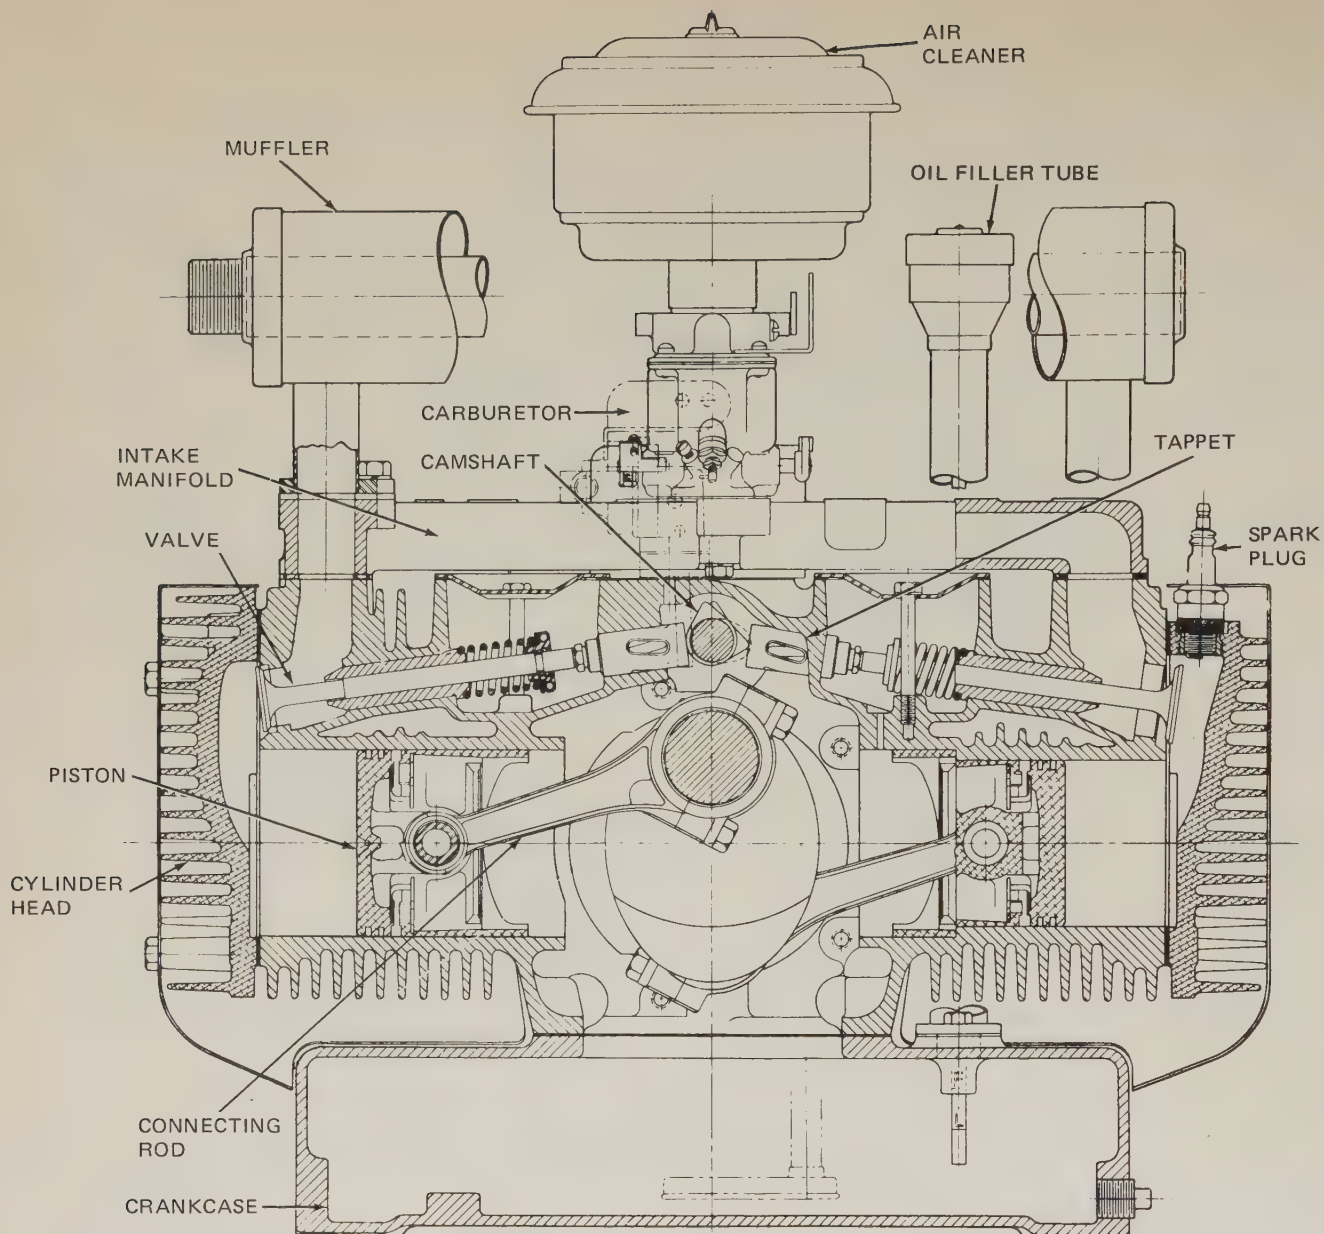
Cross-sectional view of an opposed piston two-cylinder four-cycle engine. (Onan Corporation)
